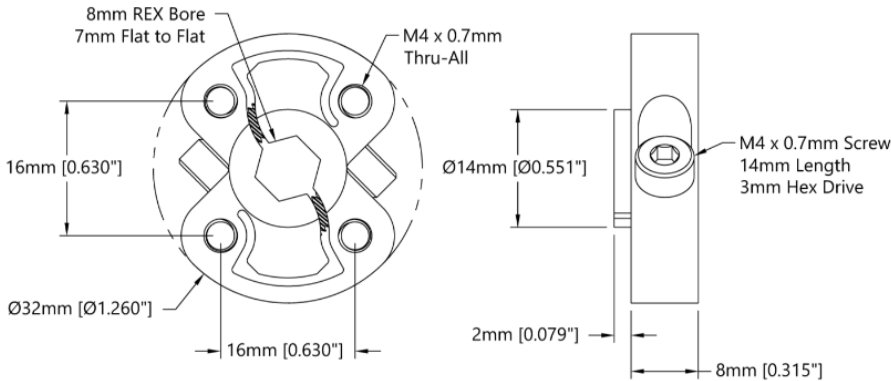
Hex bore sonic hub drawing (mm). [5]
